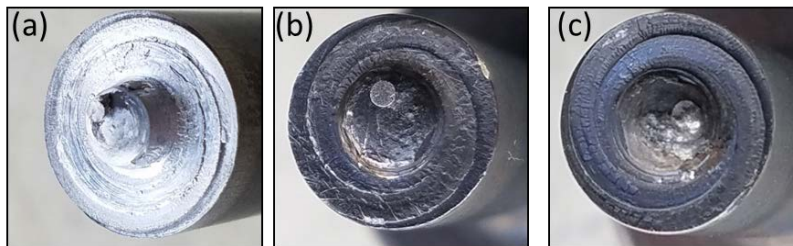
(a) FSS tool after several welds between Al and mild steel. (b) Cleaned tool after several welds between Al and mild steel, revealing the cutting edge of the scribe cutter. (c) Cleaned tool after three welds between Al and UHSS (i.e., USIBOR), showing the built-up edge around the scribe region.
